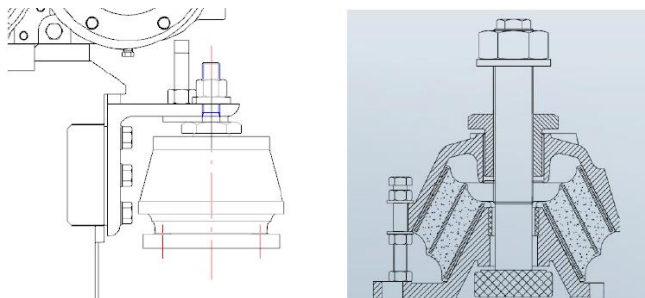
Sketch of the configuration of the engine support (left), provided by technical office. Conical T-Series resilient mount (right)
